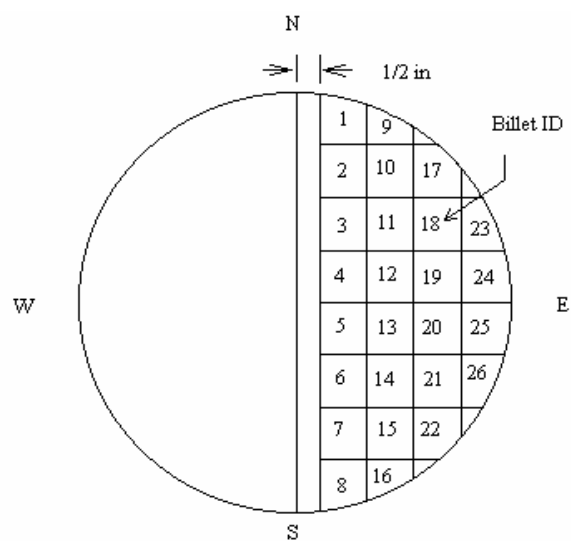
Top View of Reference Metals Company Billet Section Showing Extracted ECAE Billet ID Numbers.
